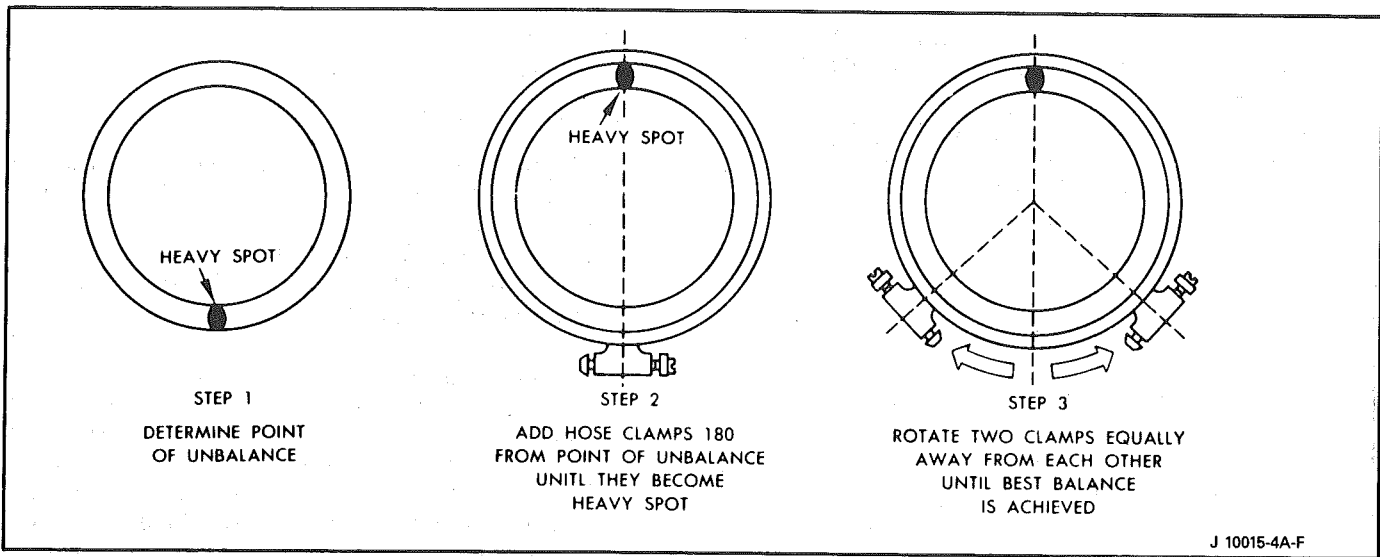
A-15 Positioning Hose Clamps to Achieve Best Balance
